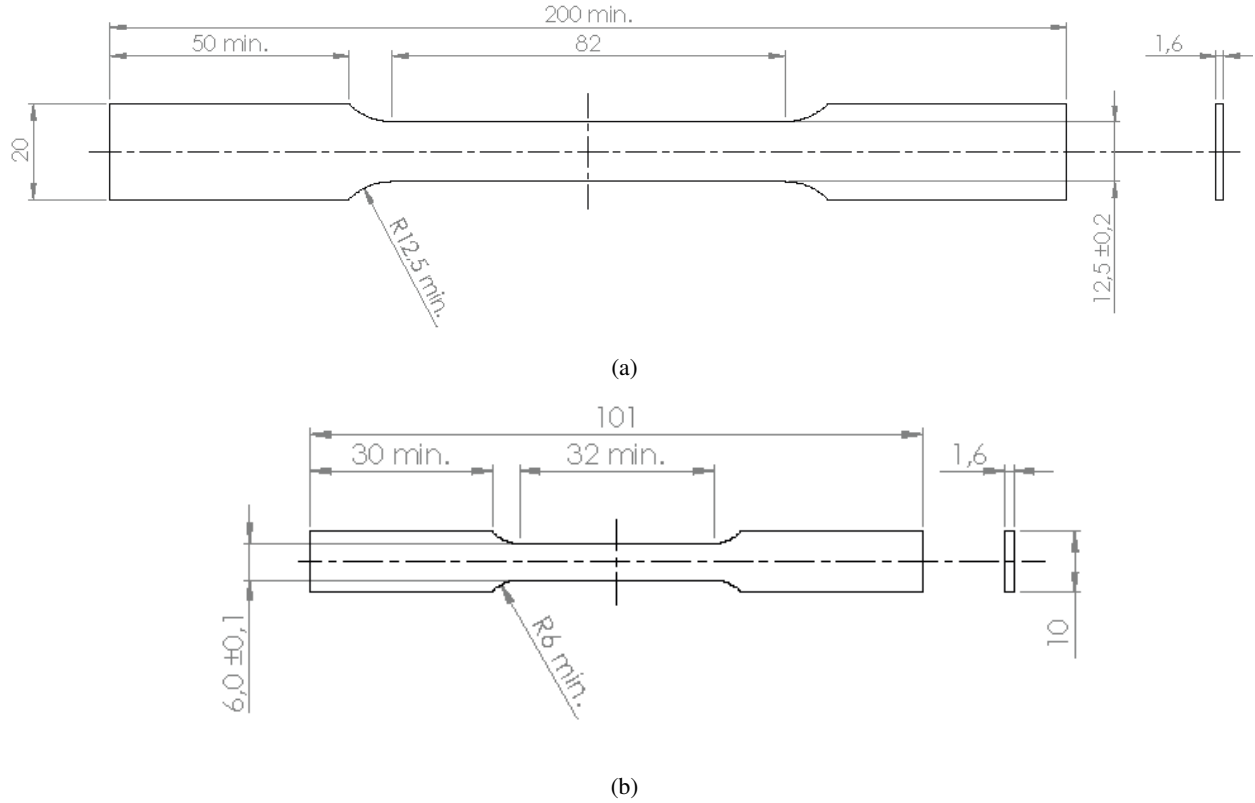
Dimensions of rectangular tension test specimens according to ASTM-E8/E8M. The dimensions are presented in millimetres. Specimens produced from the 3.2 mm thick sheets have a thickness of 3.2 mm. (a) Sheet-type tension test specimen (for the welds). (b) Subsize tension test specimen (for BM only).
